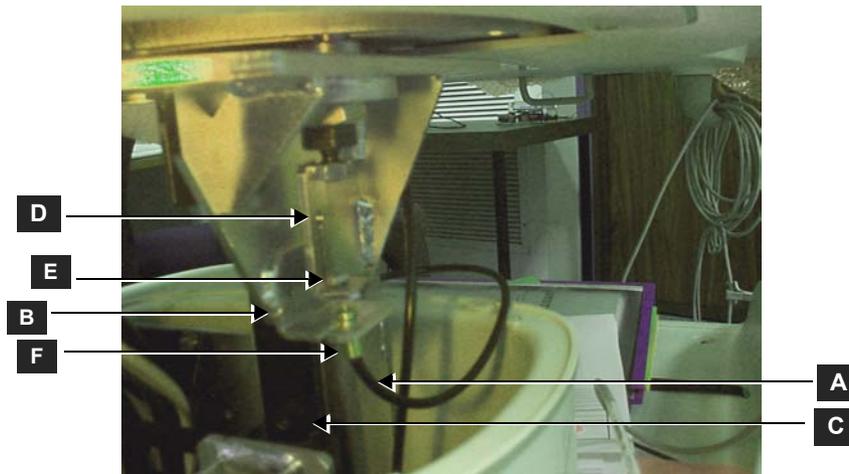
Swivel Release Cable and Vertical Axis Welding (from Side)
